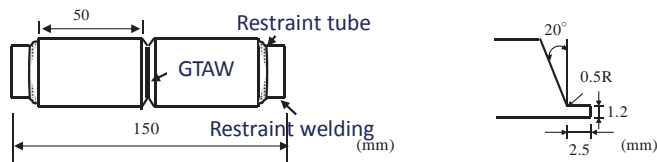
Illustration of restraint weld cracking test specimen and bevel configuration
